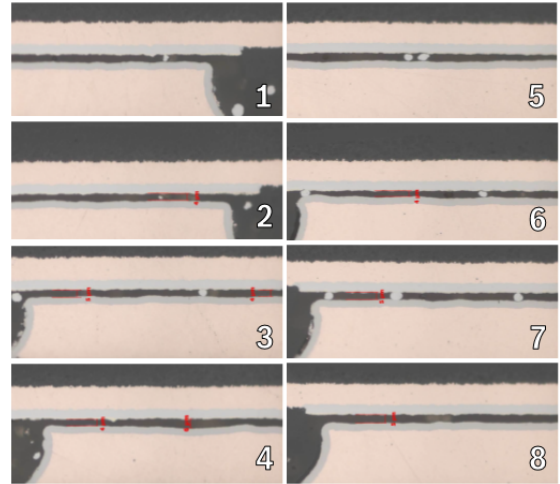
Cross-section view of pads assembled with ACA 3 [78]
